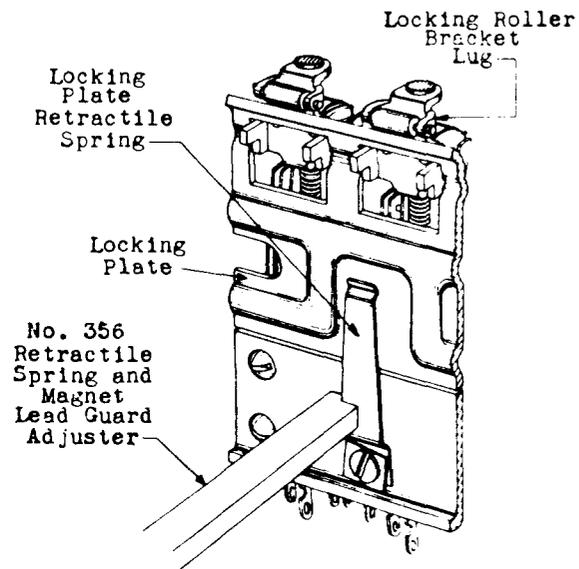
Method of Adjusting Locking Plate Retractable Spring Tension
